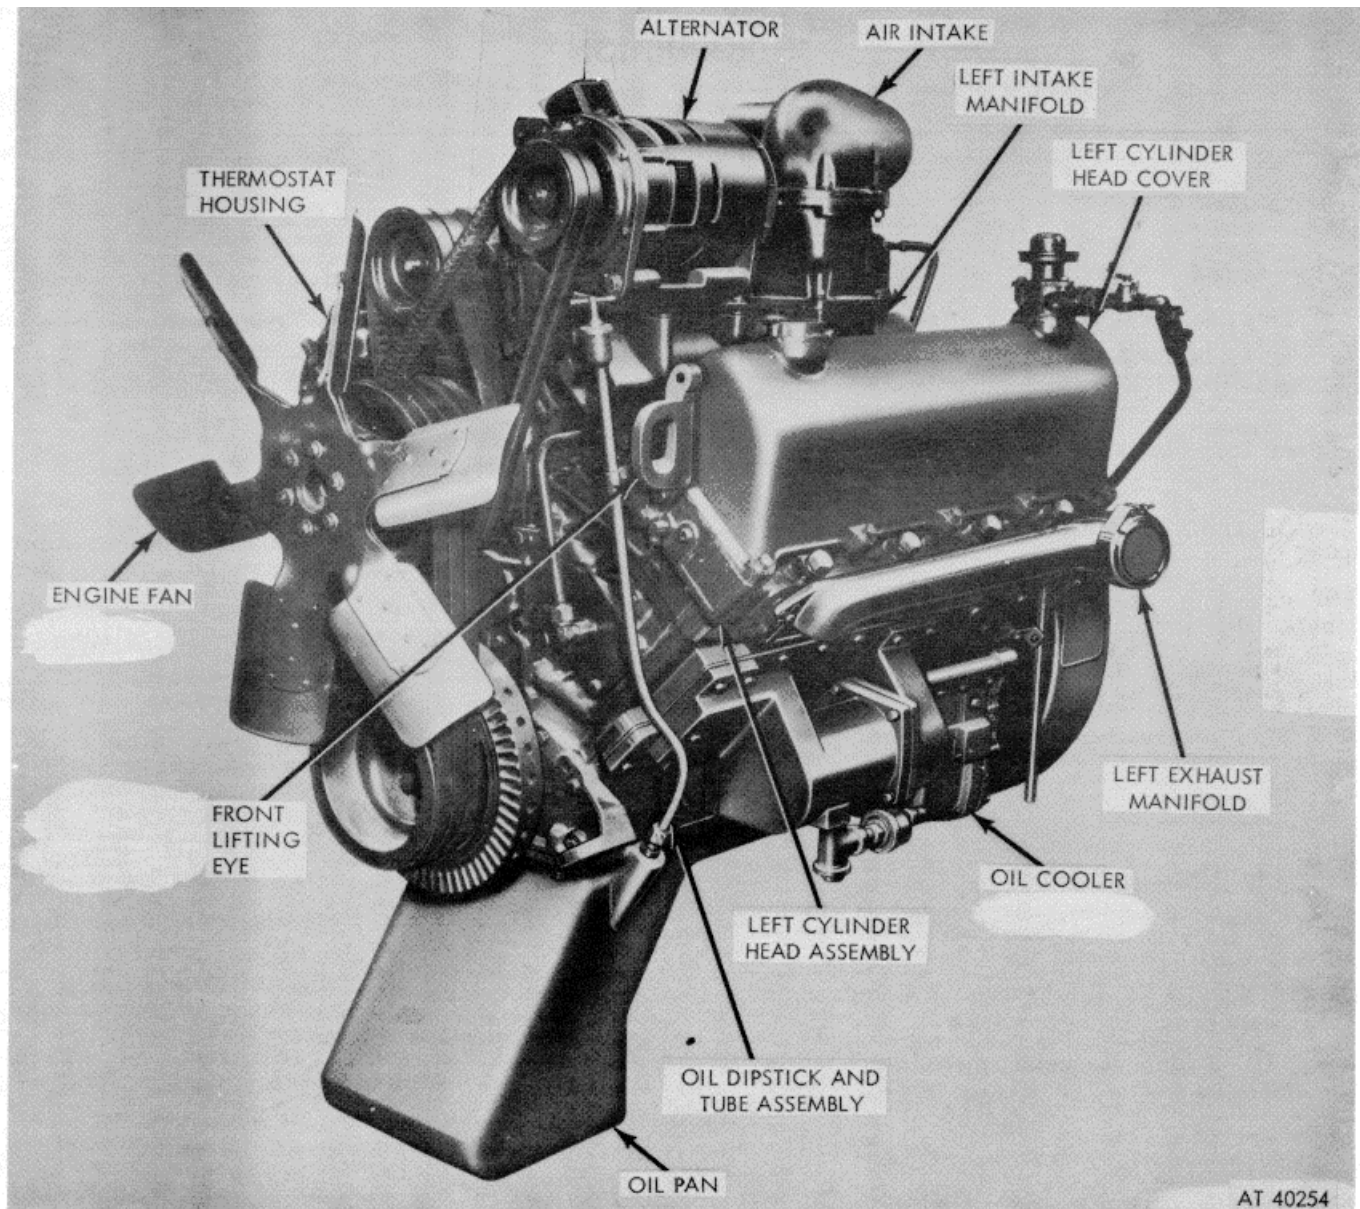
Model V8-300 engine assembly--3/4 left front view.
